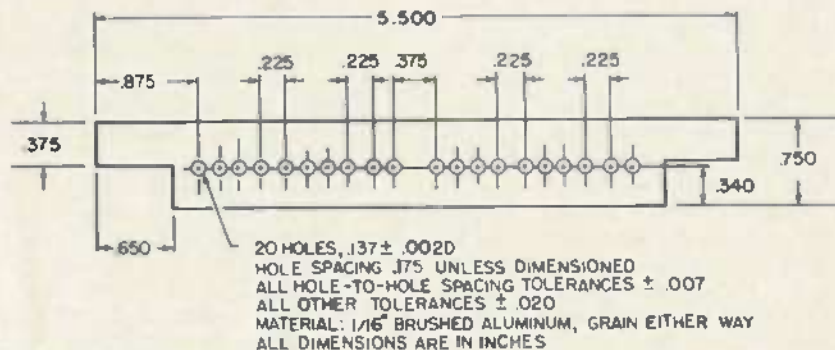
THE FRONT PANEL is formed from a sheet of 1/8-inch brushed aluminum.
